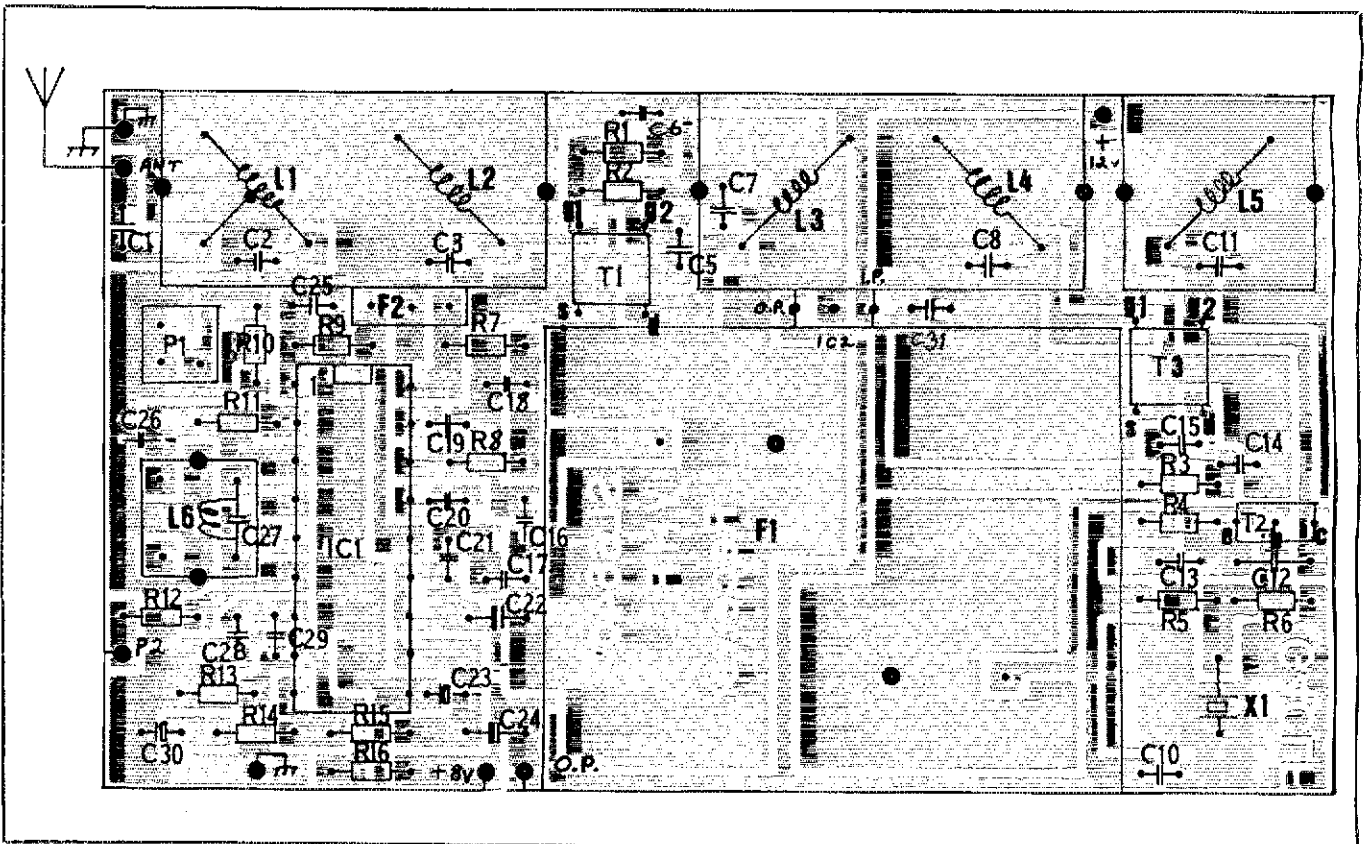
This is the parts-layout guide for the vhf receiver as viewed from the component side of the board. This drawing is not to scale. The etching pattern, which is shown in the "Hints and Kinks" section of this issue, is drawn to scale.
